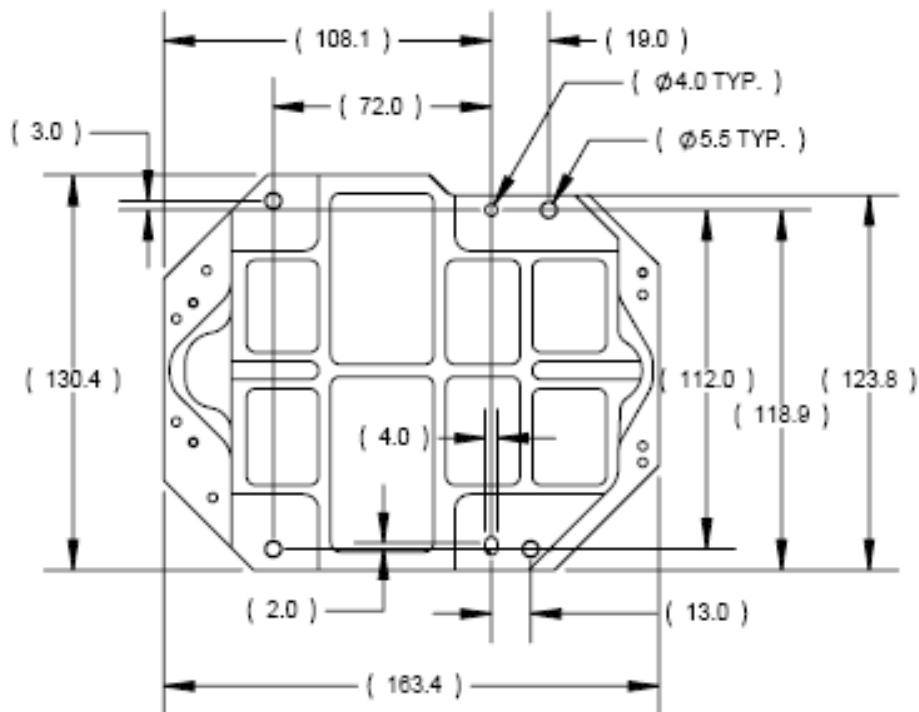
(2 of 4) IMU Type 31 & 40 Mounting Detail
